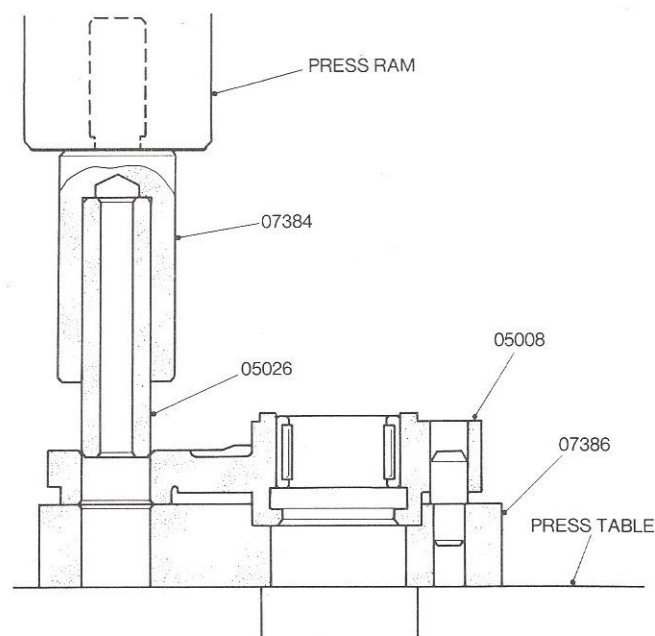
Assembly of the Layshaft to the Layshaft Carrier
